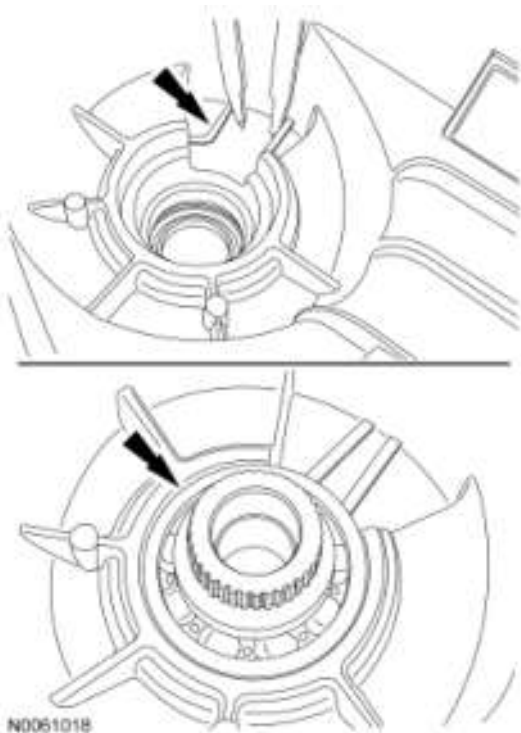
Expanding Snap Ring & Installing Output Shaft
